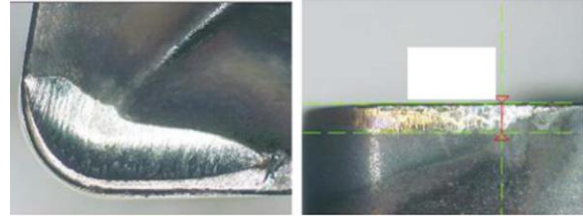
Example of crater (left) and flank (right) wear in a cutting tool.
